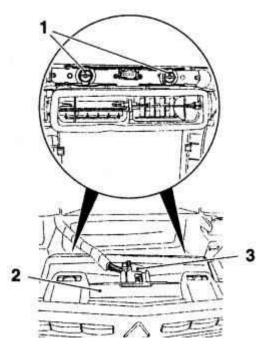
Removing the console switch section of the dashboard: 1 - rotary latches, 2 - block of switches, 3 - connector wiring
